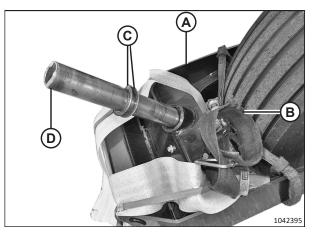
Caster Wheel Assembly in Shipping Configuration
